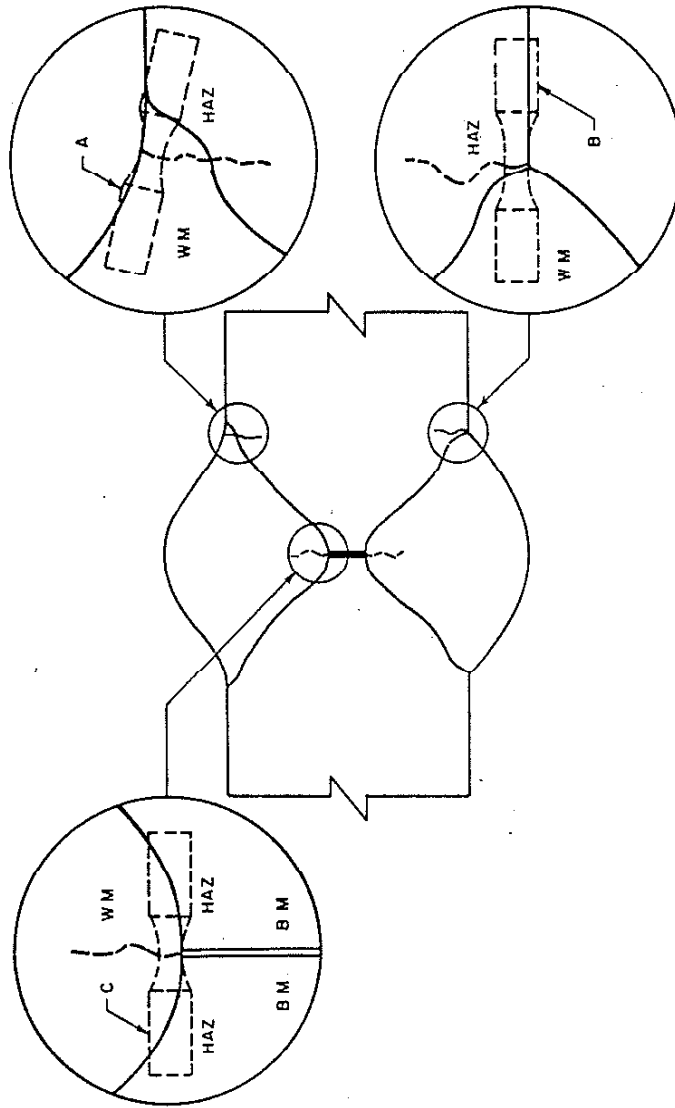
Typical locations of fatigue crack initiation in a butt weld. Fatigue cracks can initiate: in diluted, untempered weld metal (A); in the heat-affected-zone close to the line of fusion (B); and in tempered weld metal (C). The dashed-in fatigue specimens are laboratory smooth specimens which, if subjected to the local strains, should initiate a fatigue crack at the same life as the region in question (13).
